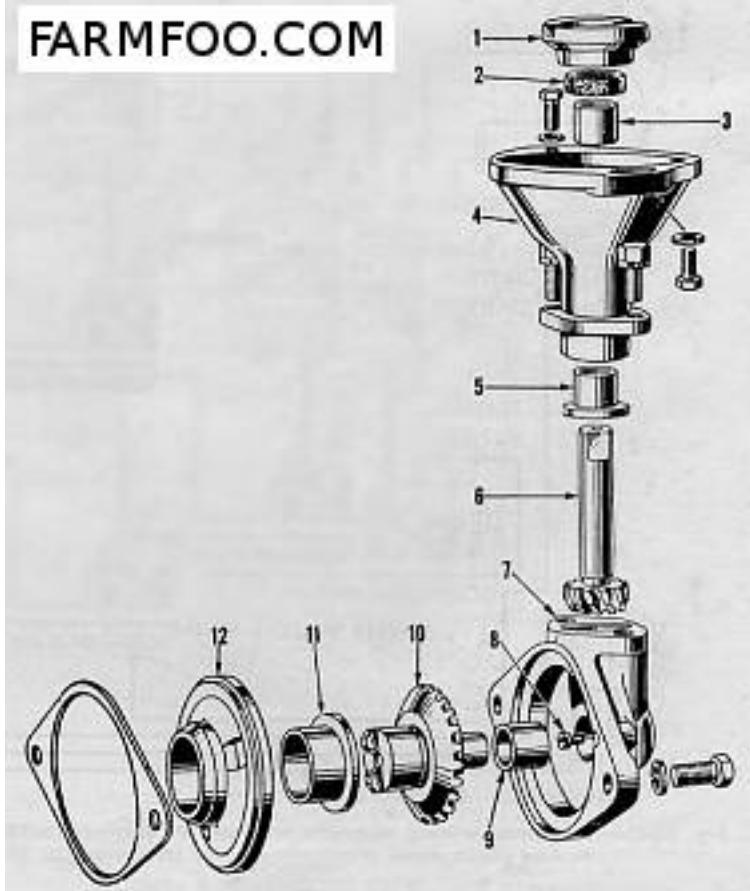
Magneto drive adapter optional equipment on 2N.
